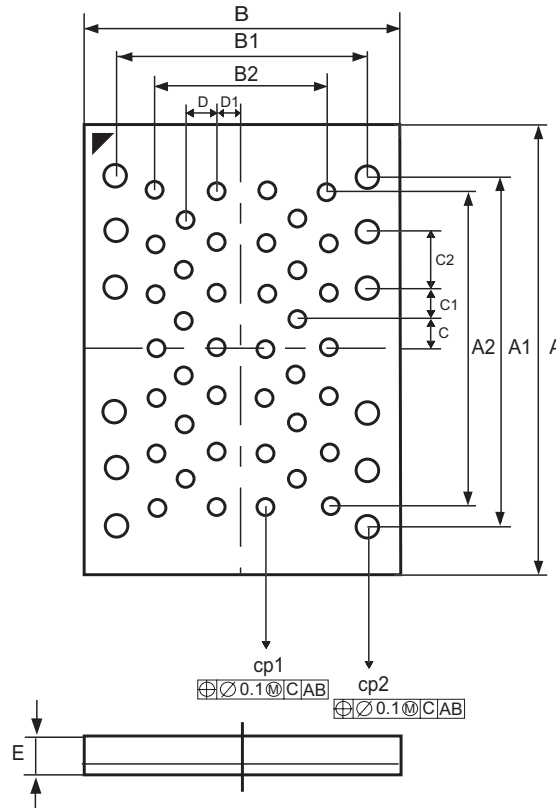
52-ULGA, 12 x 17mm, Package Outline (Top view through package)
